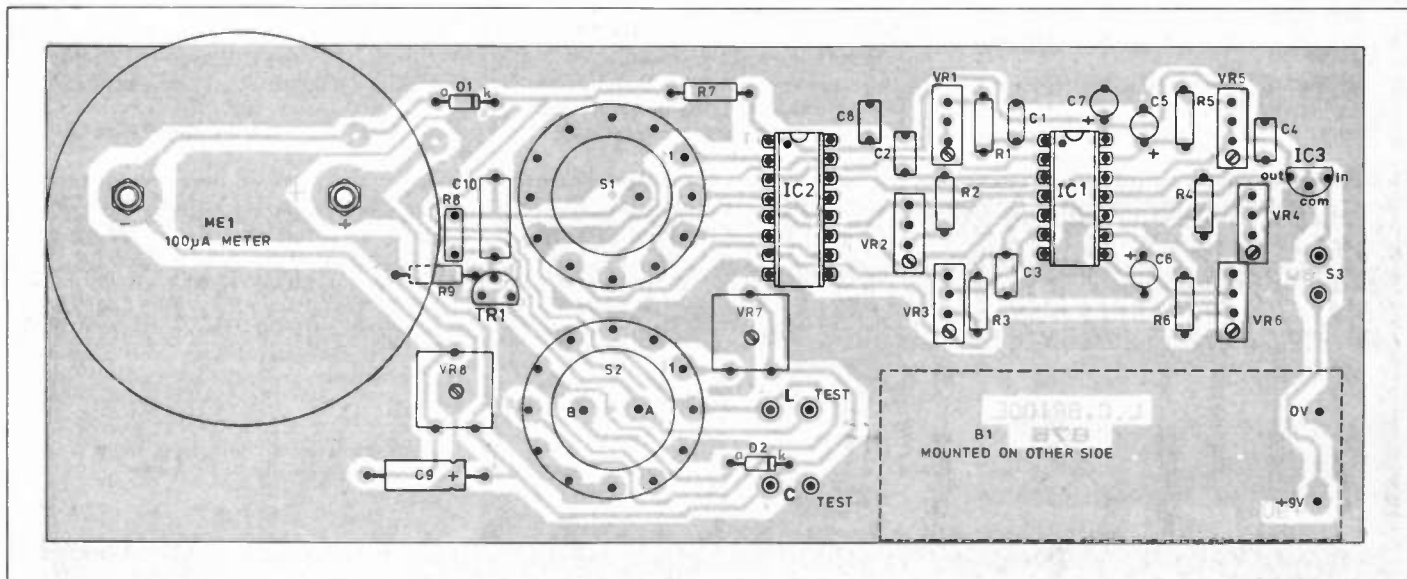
Printed circuit board component layout and full size copper foil master pattern for the Capacitance and Inductance Meter. The battery holder is mounted on the copper side of the p.c.b.
